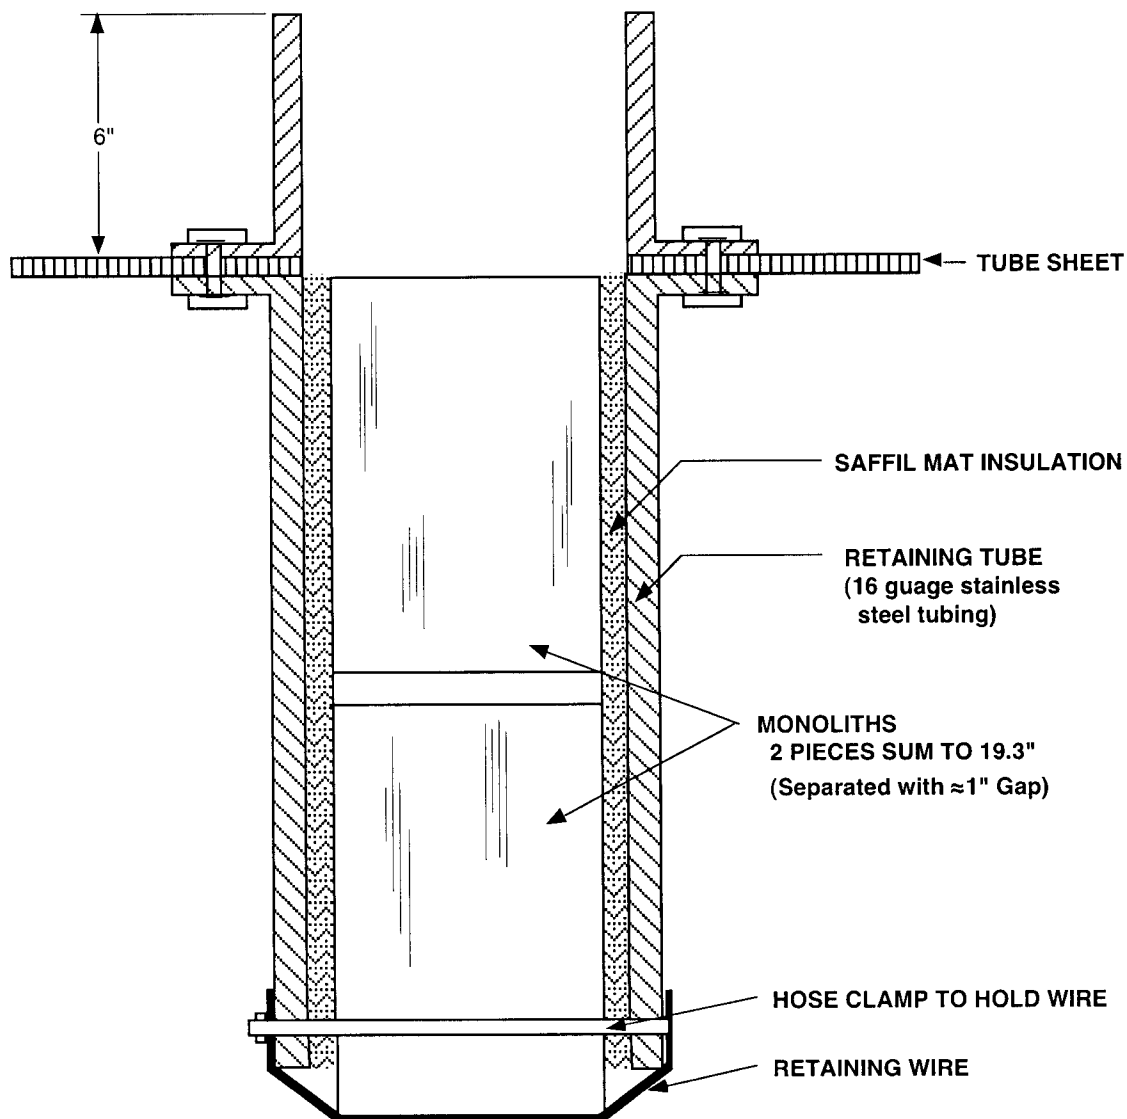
EXPLODED VIEW OF MONOLITH CHAMBER WITH RETAINING WIRE
